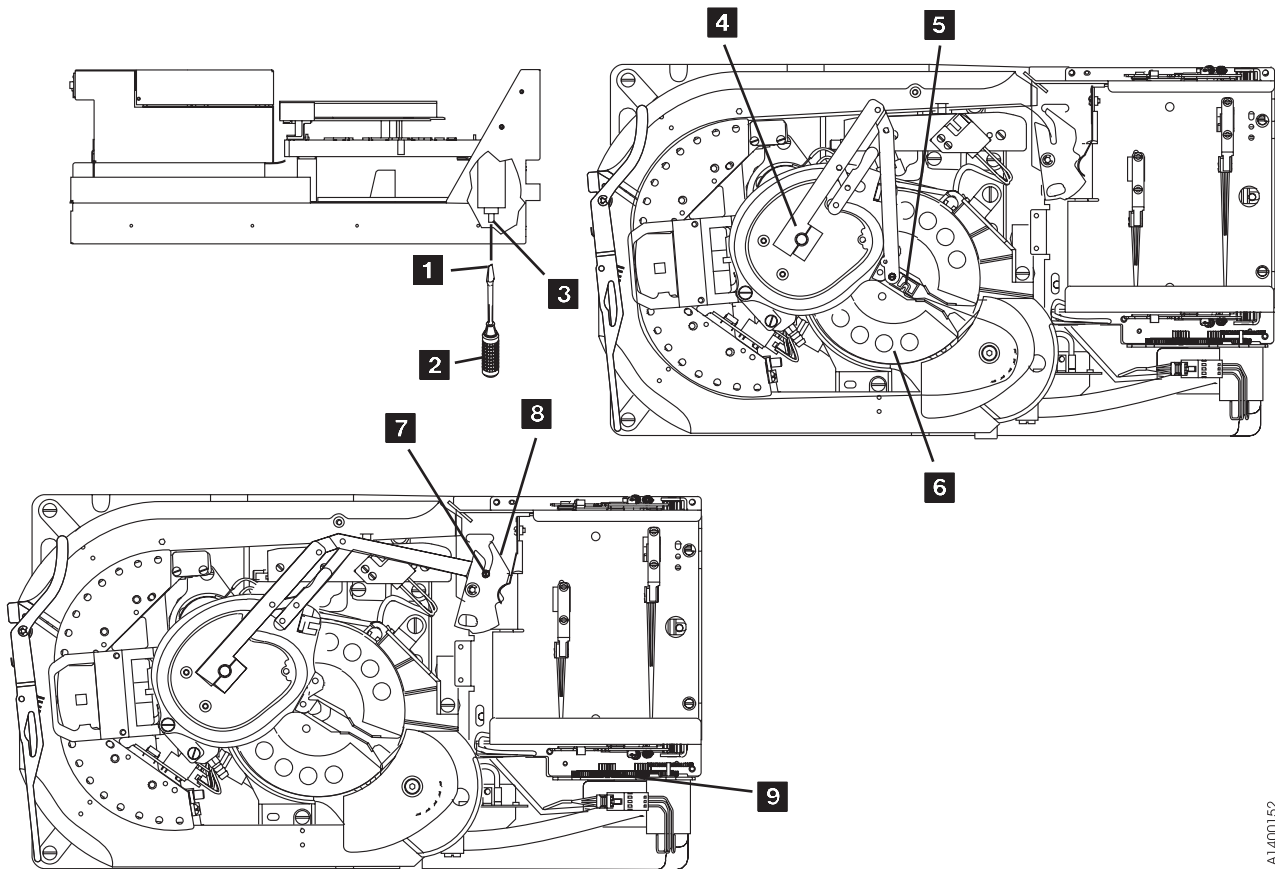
Leader Block and Threader Pin in Machine Reel Hub
